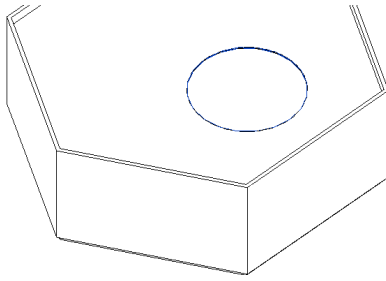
Sketching the opening in the ceiling plan using the reference planes
